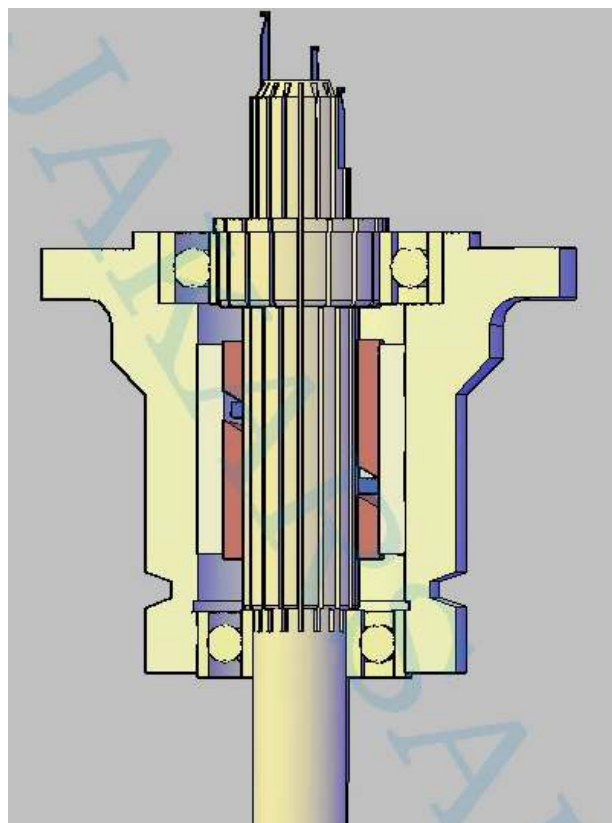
A schematic exploited view of the knitting head. The cam driving the needles is shown in pink. Inside the cam grove the butts of the needles are seen in blue. This picture is prepared by using Catia.
